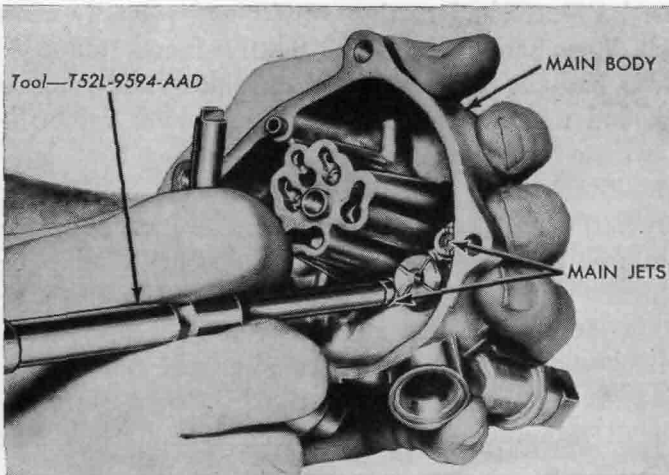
Using jet wrench to remove main jets. (Ford Motor Company)
